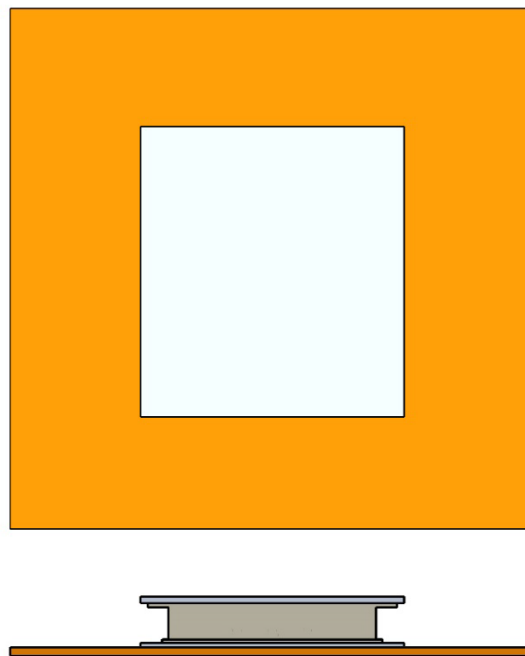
Top plate has same footprint as the bottom plate and should be aligned the way.
